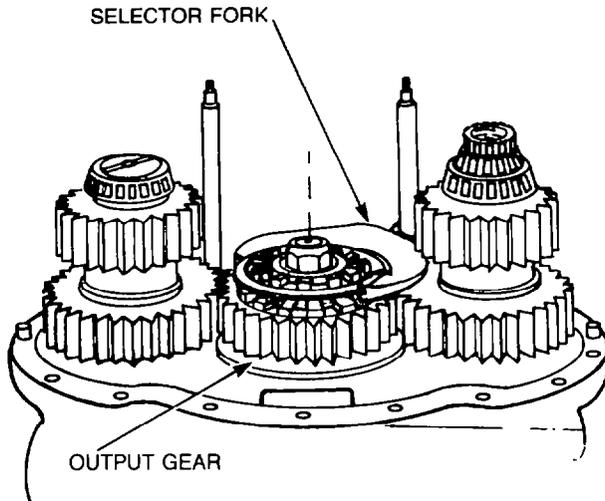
Installing Selector Fork, Shaft and Clutch Collar
